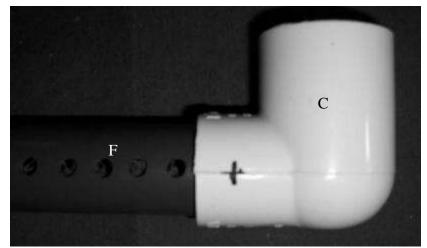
Step 14, Marking the Hole to be Drilled.
